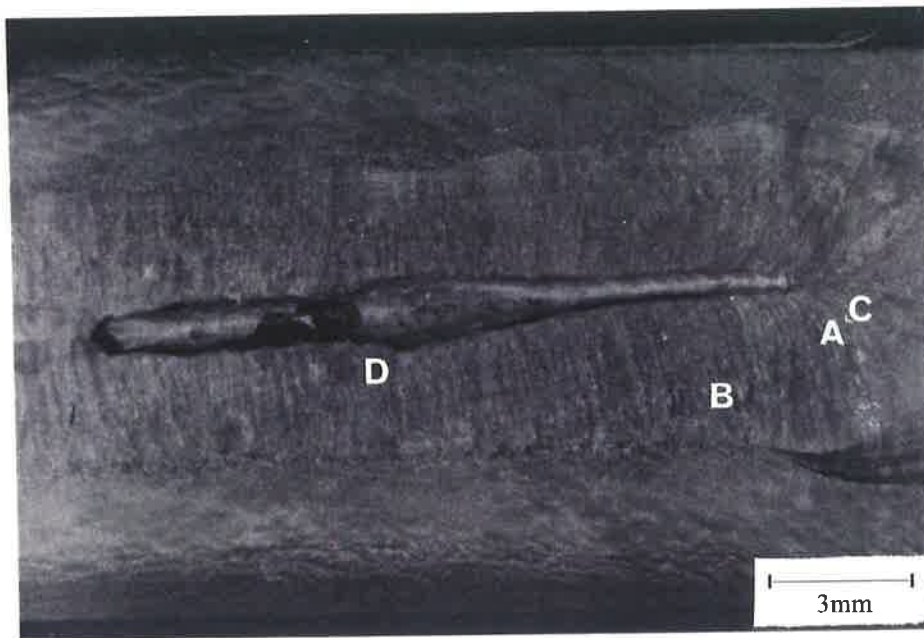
Macrograph of the longitudinal horizontal section of the weld etched in nital. Welding conditions: a weld travel speed of 400mm/min and a welding current of 180A. The root gap was 1.5mm and the root face was 2.0mm.
